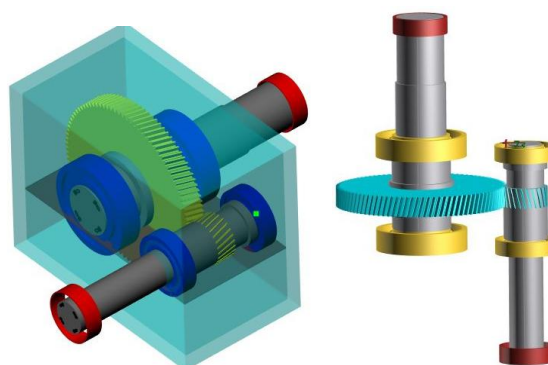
Gearbox Model (Kissys 2020) & Gear pair
